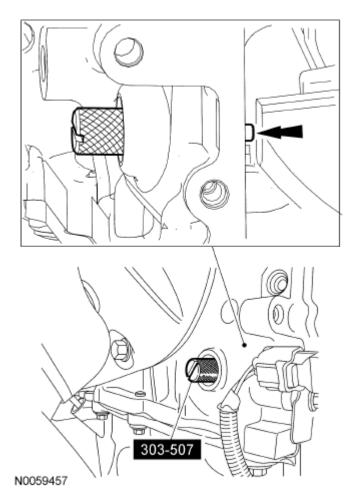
Identifying Crankshaft TDC Timing Peg (303-507) Courtesy of FORD MOTOR CO.
